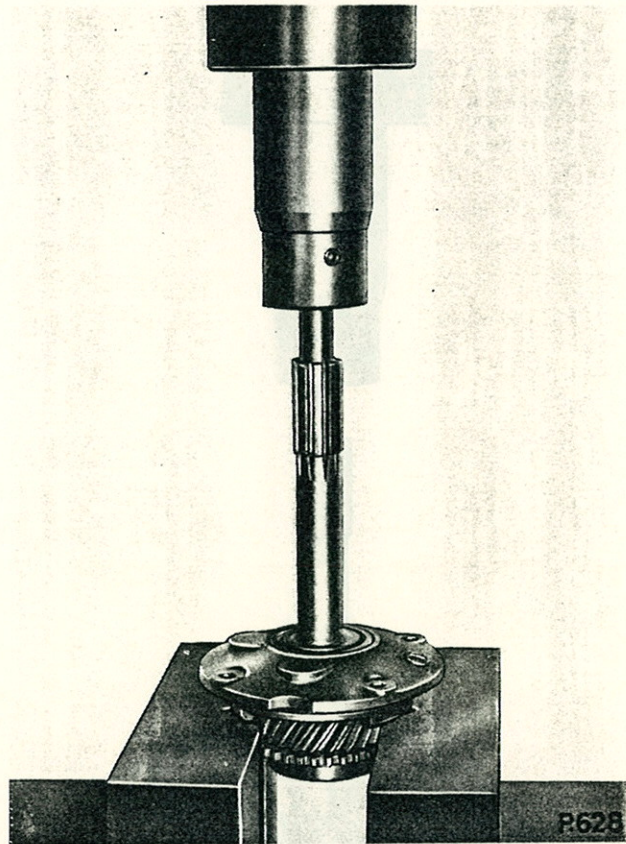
Pressing the primary shaft complete with the bearing out of the front cover
